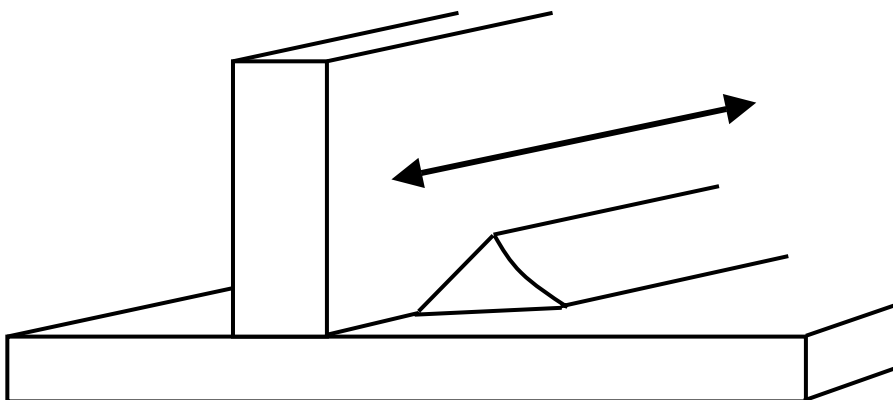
Blending the ends of non-continuous fillet welds parallel to fluctuating load
